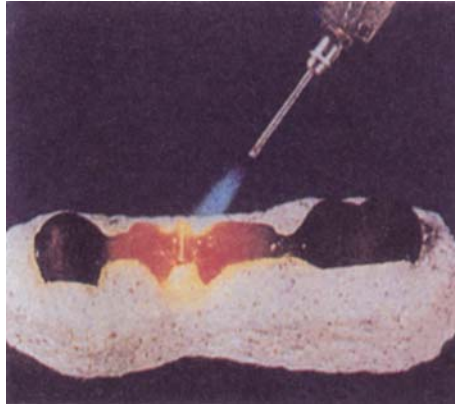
Flame soldering of a two part metal bridge after embedding in soldering investment
